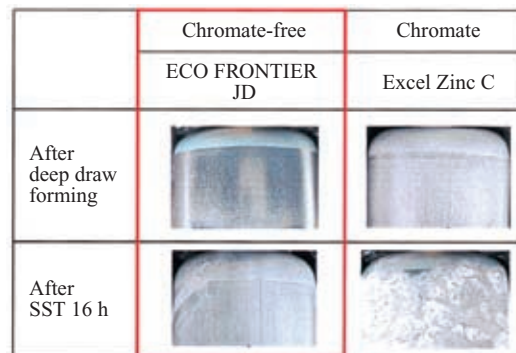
Appearances of ECO FRONTIER JD and usual chromate coated steel sheet after deep draw forming and after SST 16 h⁹⁾
